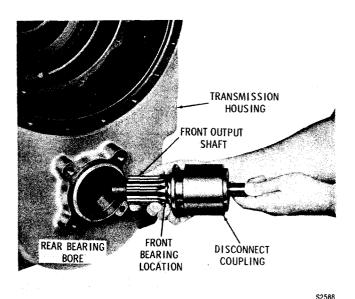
Removing front output shaft and disconnect coupling (-1 models with output disconnect)
